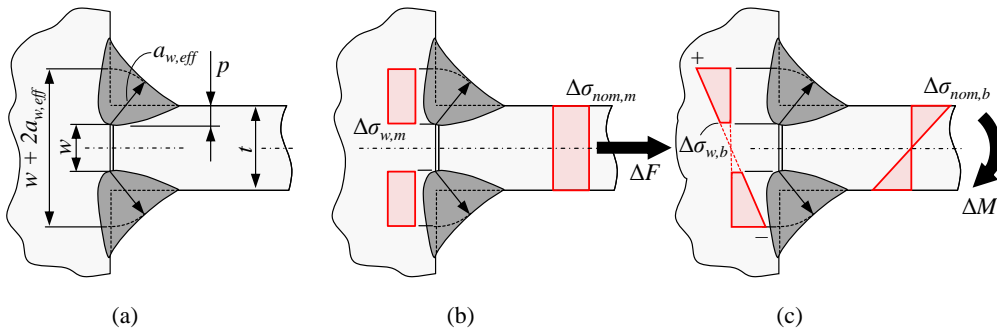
(a) dimensions of a double-sided fillet-welded LC-joint, and NWSs in the case of (b) axial and (c) bending loading.  $p$  is the weld penetration depth and  $\Delta F$  is the axial force range.
